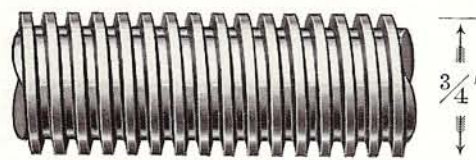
Section of Acme Thread Lead Screw, Actual Size.
